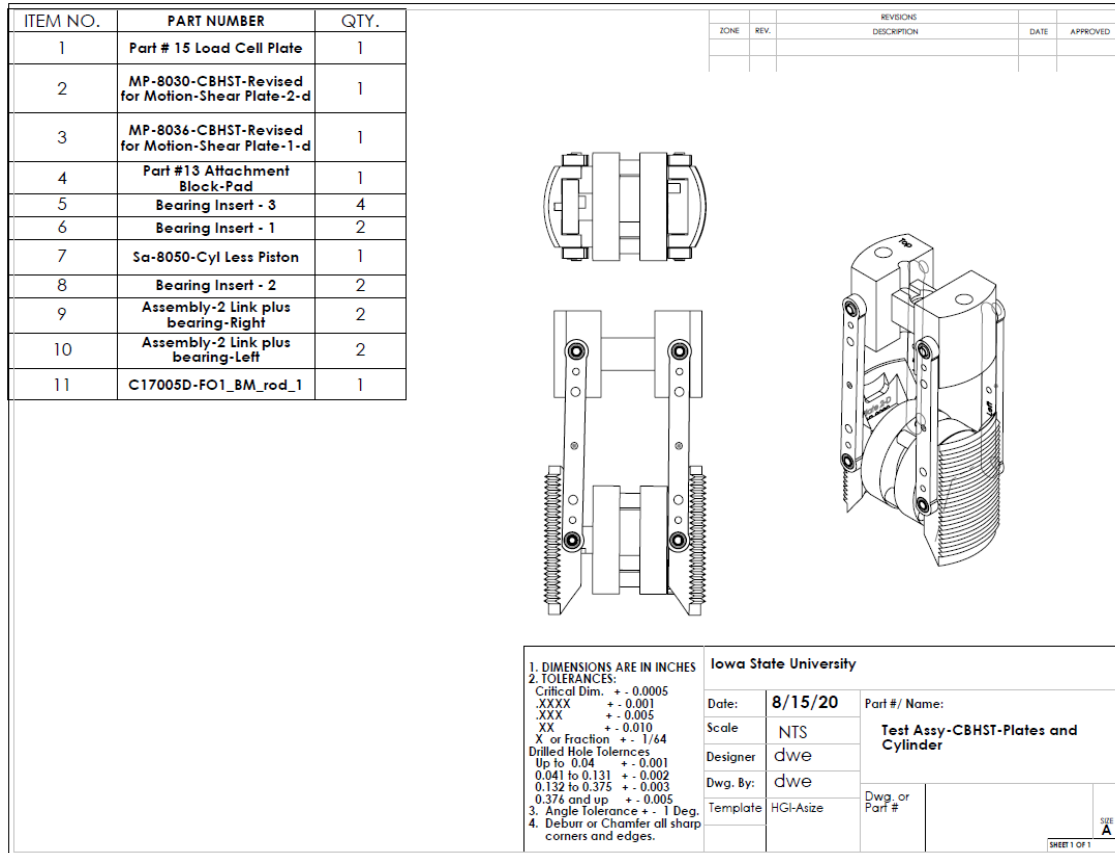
CAD drawing of CBST shear head with new shear plate linkages and load cell housing
